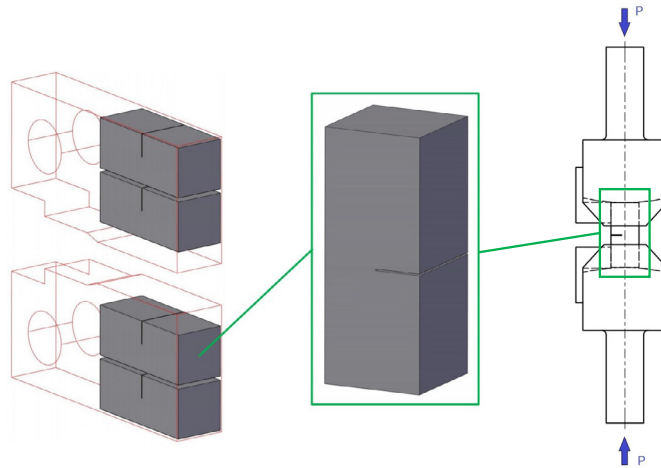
Starter block (SENT) specimens and cyclic compression pre-cracking.
